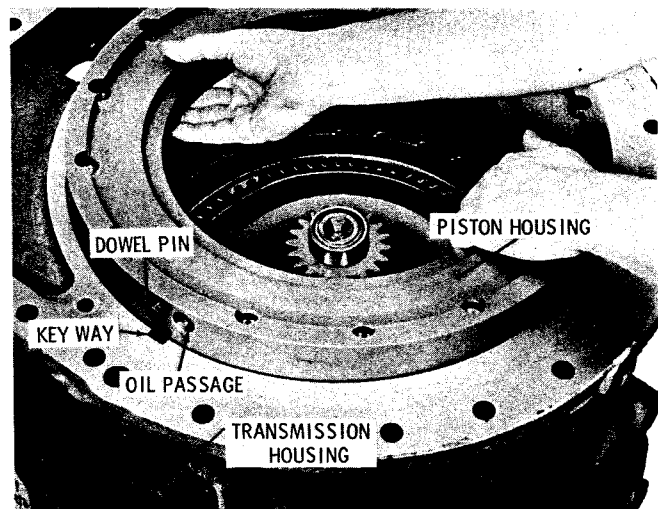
Installing intermediate-range clutch piston housing and piston
